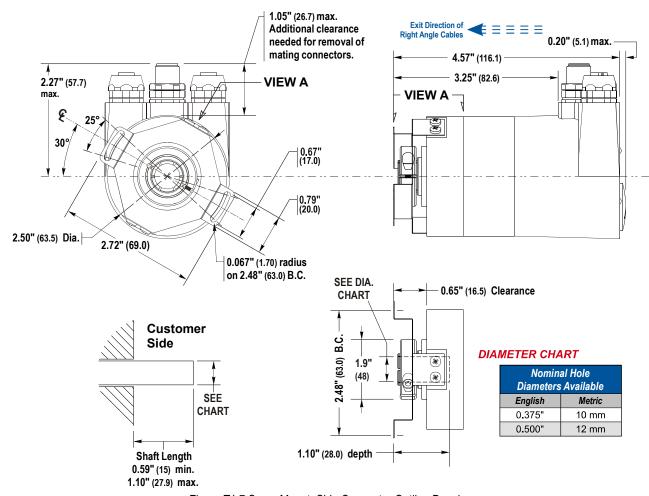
Servo Mount, Side Connector Outline Drawing
